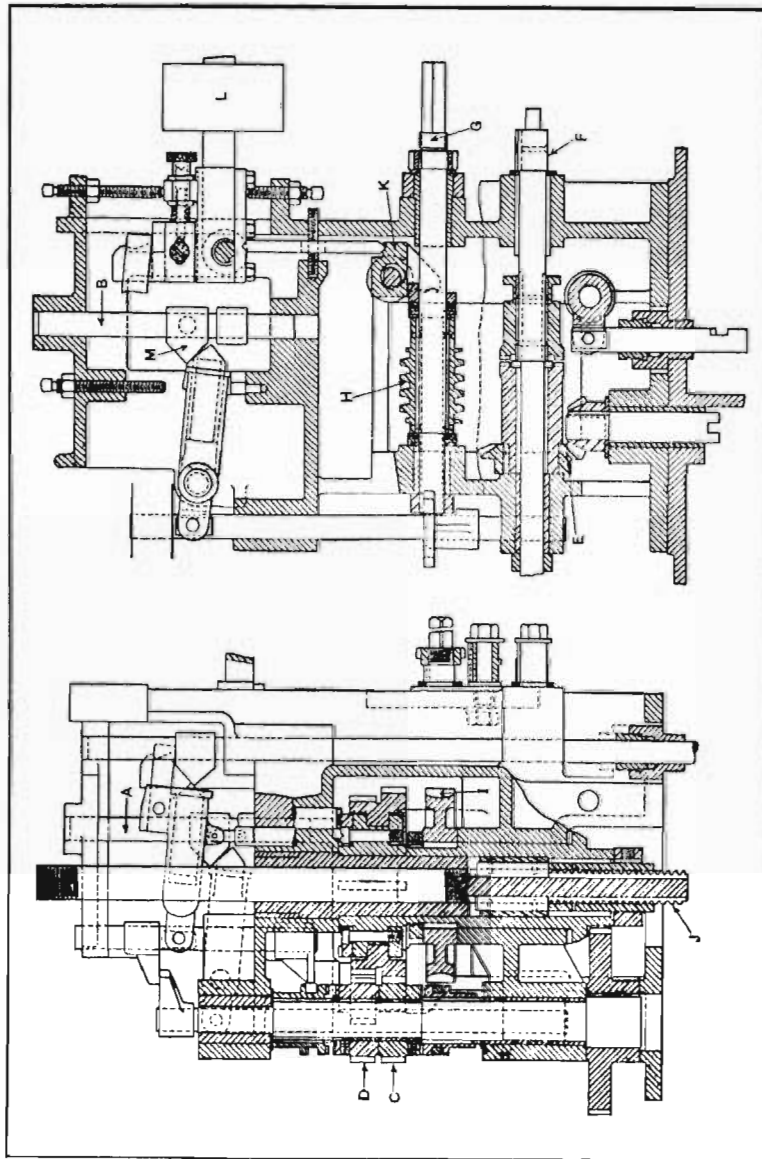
Mechanism which Automatically Disengages the Feed if Pressure on Tool Becomes Excessive
